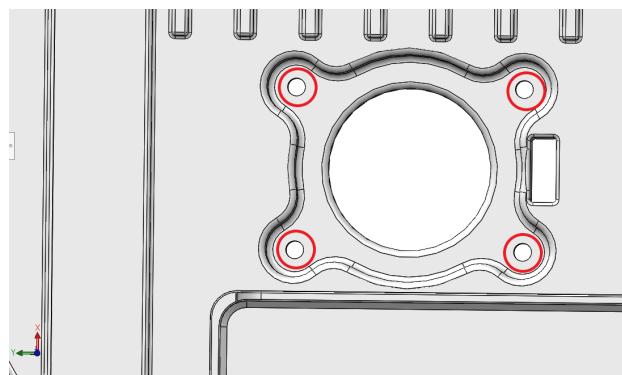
The holes for connecting the drill suspension and DC-motor.
